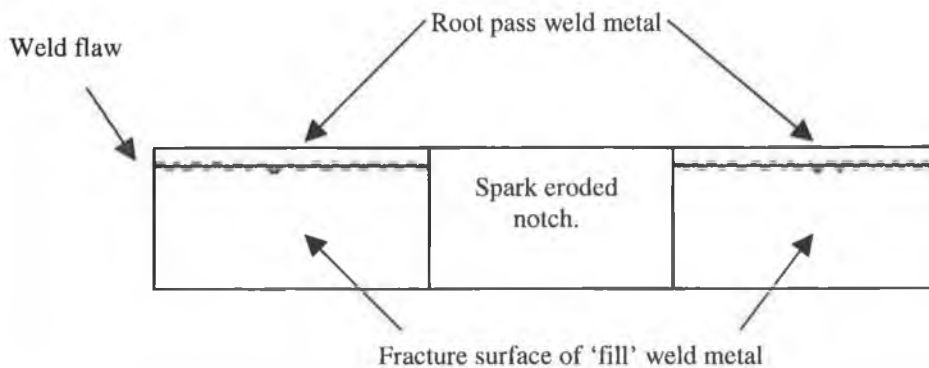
Lack of fusion between GTA root pass and SMA weld metal
